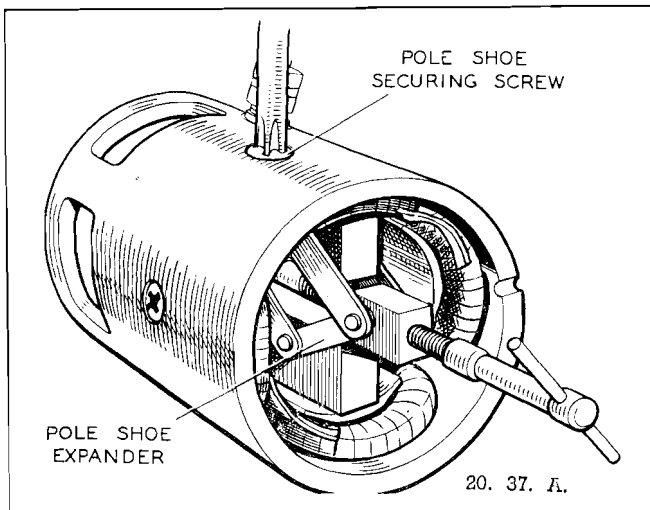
Tightening Pole Shoe Screw using Pole Shoe Expander
